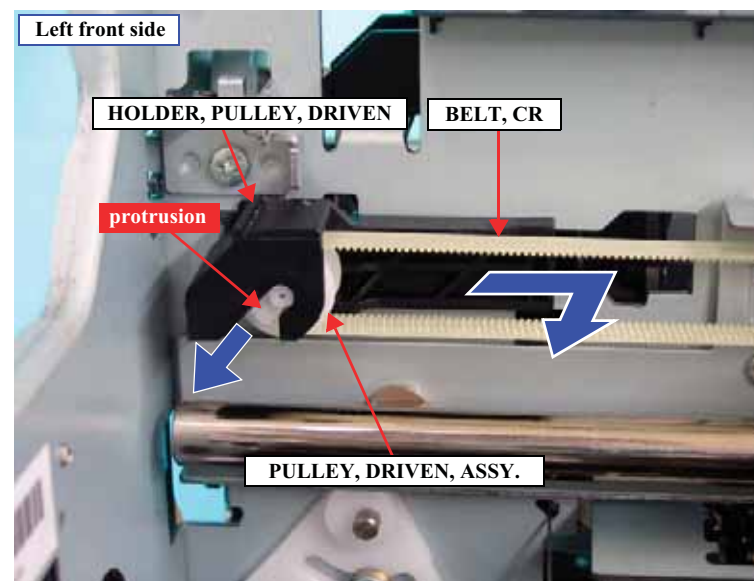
Removing the PULLEY, DRIVEN, ASSY.
